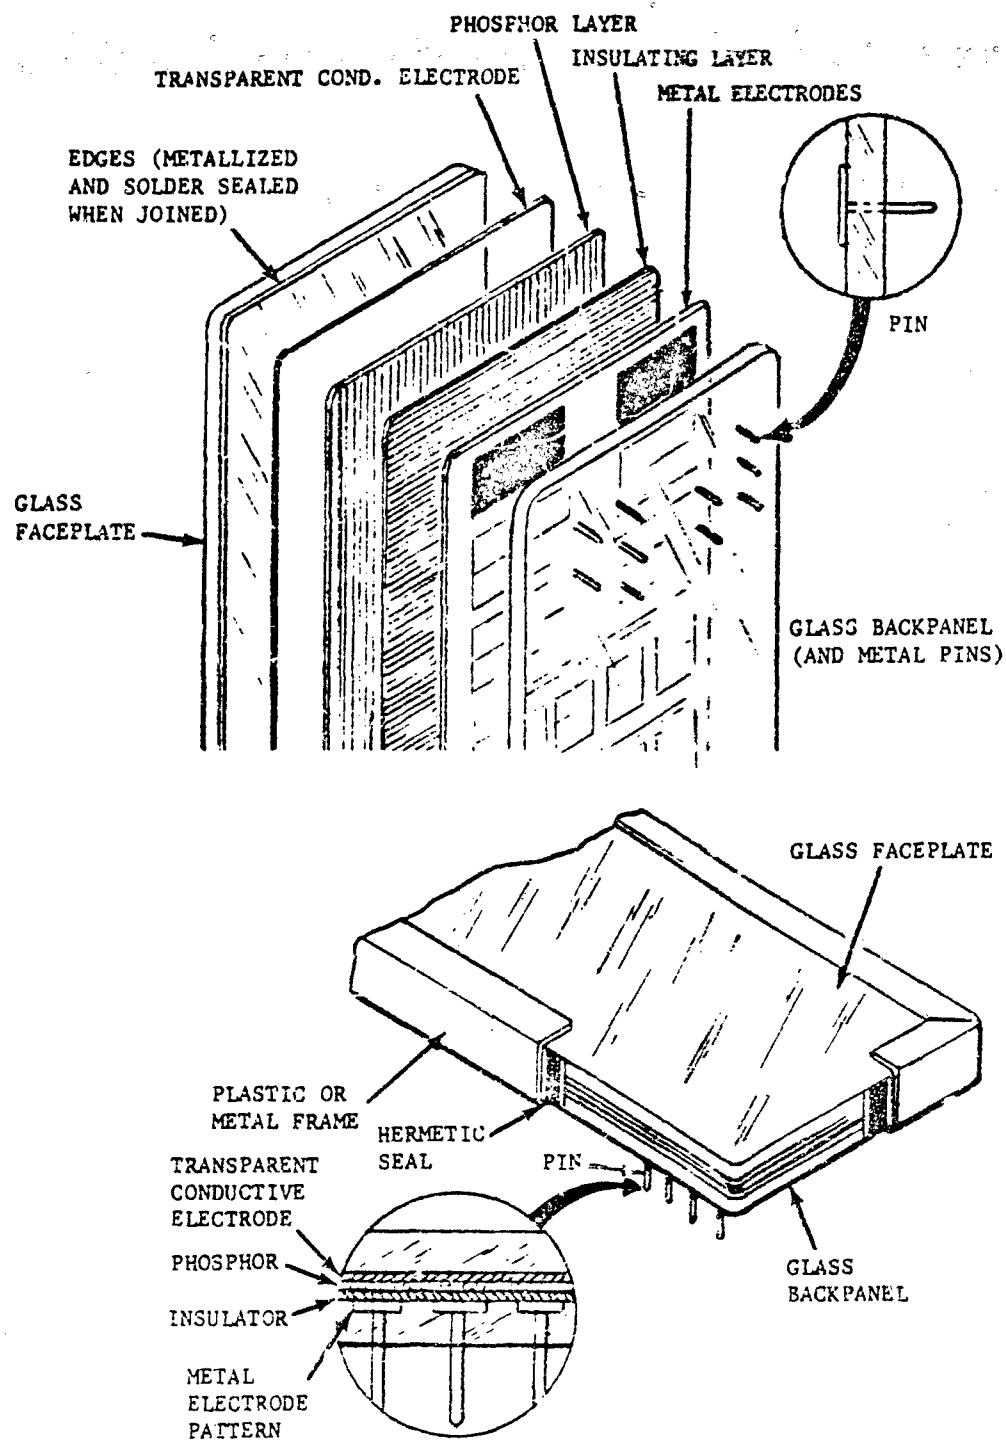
Exploded View of All-glass EL Readout Panel and Sectional View of Metal-glass Unit
